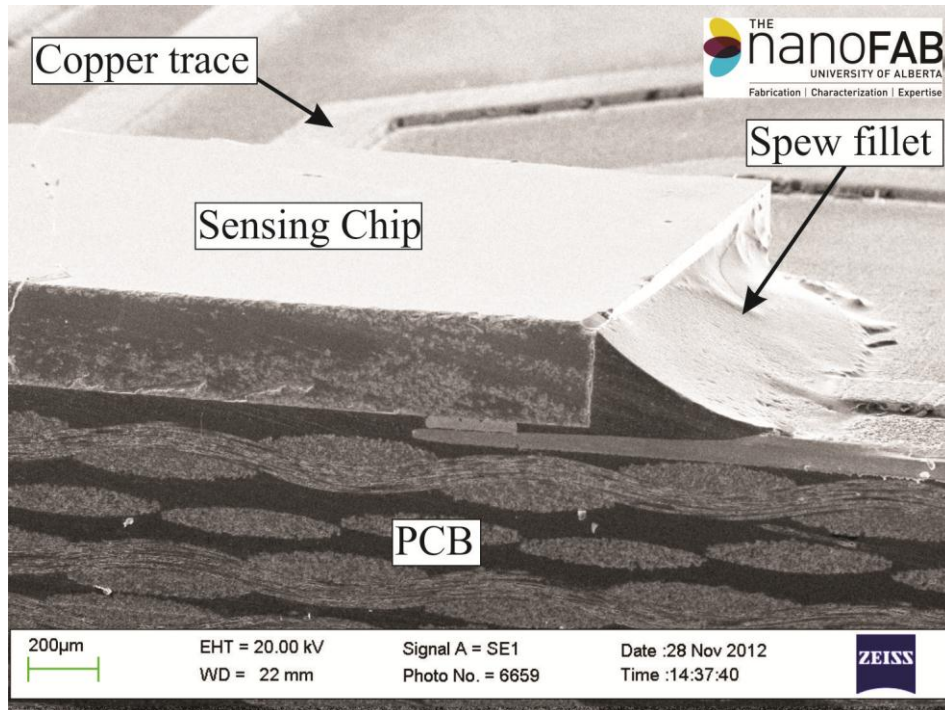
SEM image of the PCB/Chip cross-section showing ACA spew fillet
